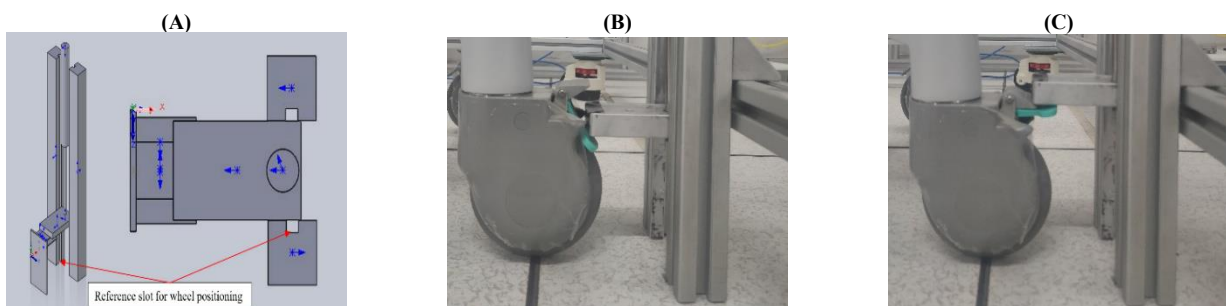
The Developed Test Fixture (A) CAD Model (B) Actual - Engagement State (C) Actual - Disengagement State
